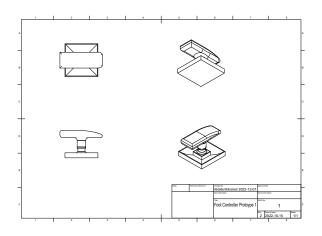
Foot Controller Prototype 1 Technical Drawing
